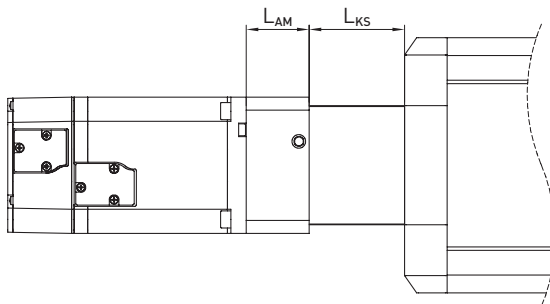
Motor connection of linear table HT-S without belt drive
